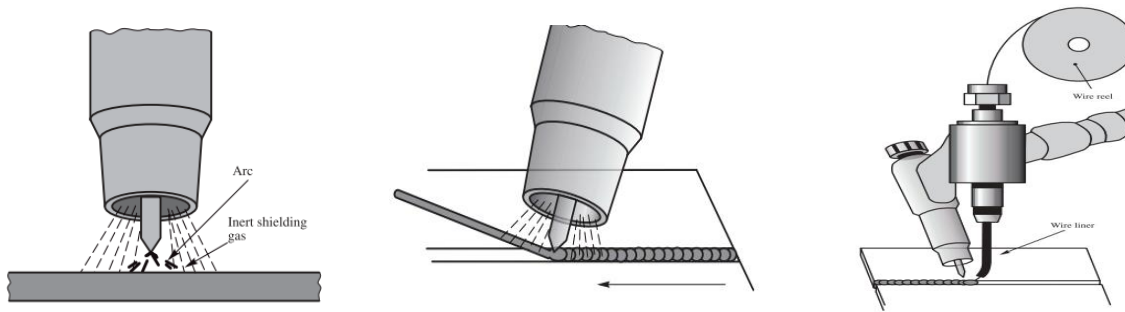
TIG welding Principle, feeding of filler material and automatic feeding of filler material
